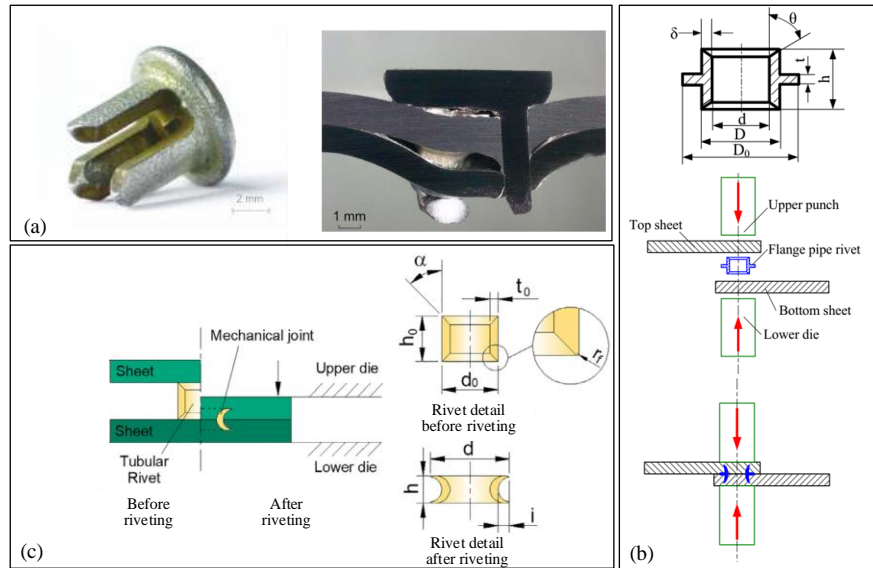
Different geometries of (a) a new self-flaring rivet [86], (b) an inner flange pipe rivet [87] and (c) a double-side self-piercing rivet [89]
